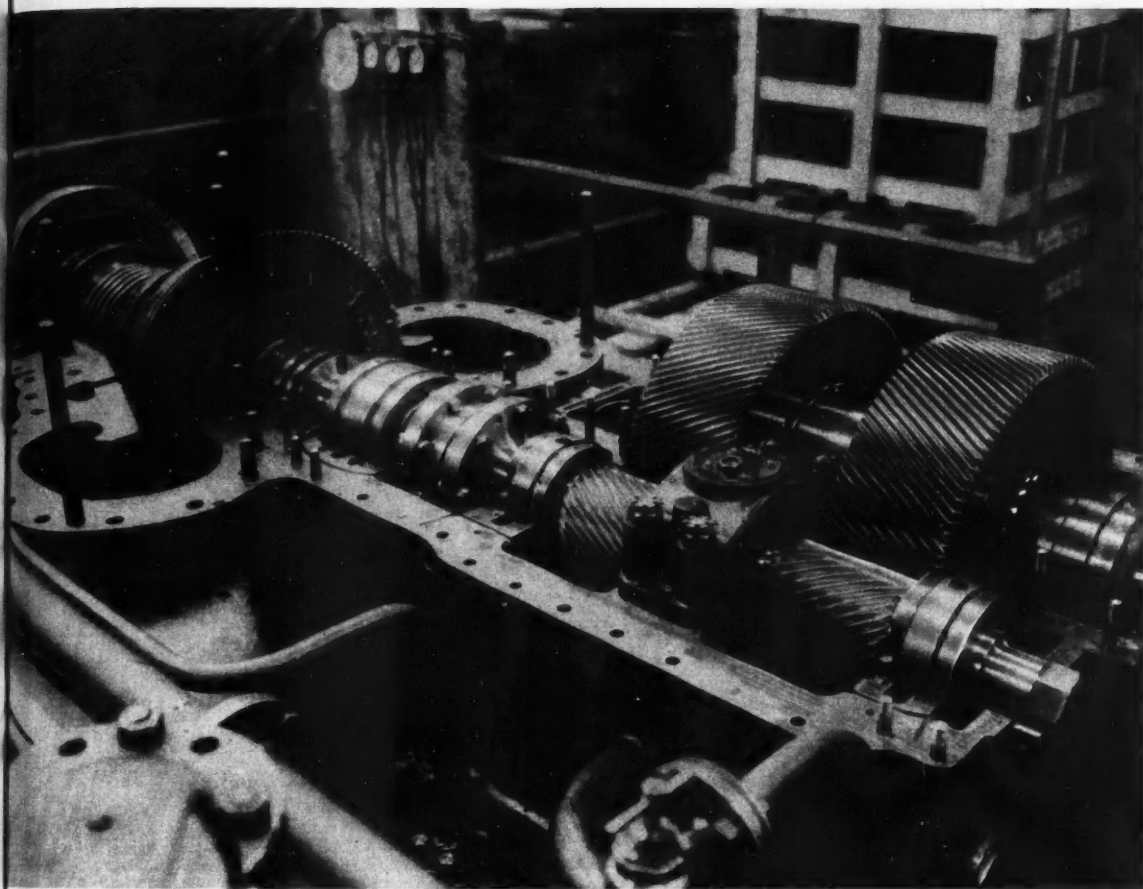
1,000 b.h.p. geared turbine with covers removed.
